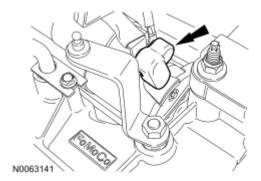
Locating Starter Motor Electrical Terminal Cover Courtesy of FORD MOTOR CO.
